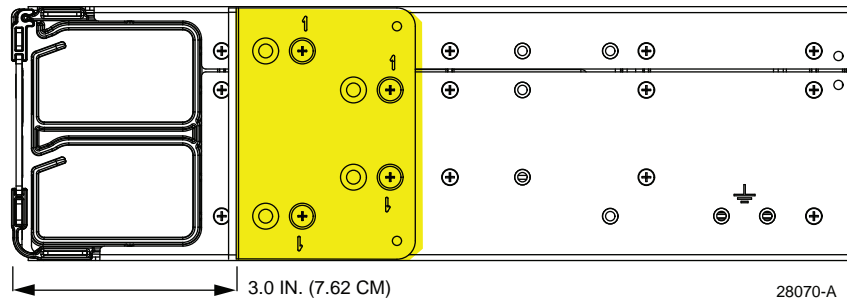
Rack Mounting Position for 3.0-Inch Recess (Shipped Panel)
